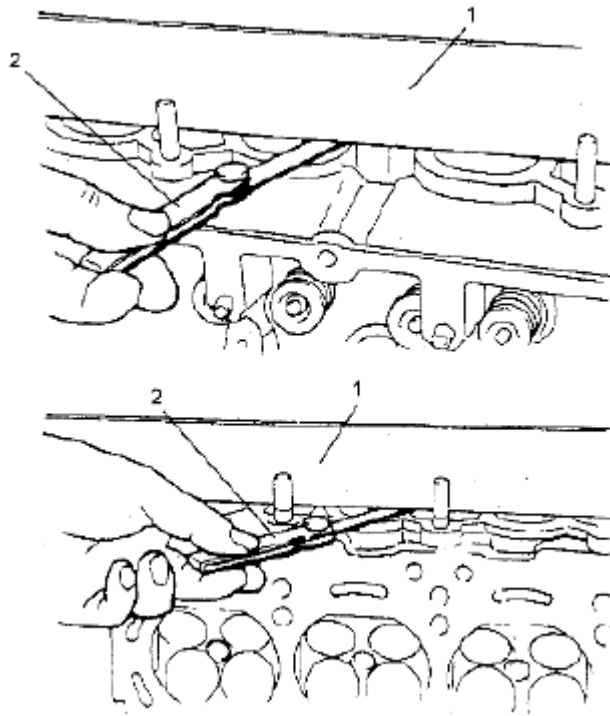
Checking Cylinder Head Gasket Surface Distortion
